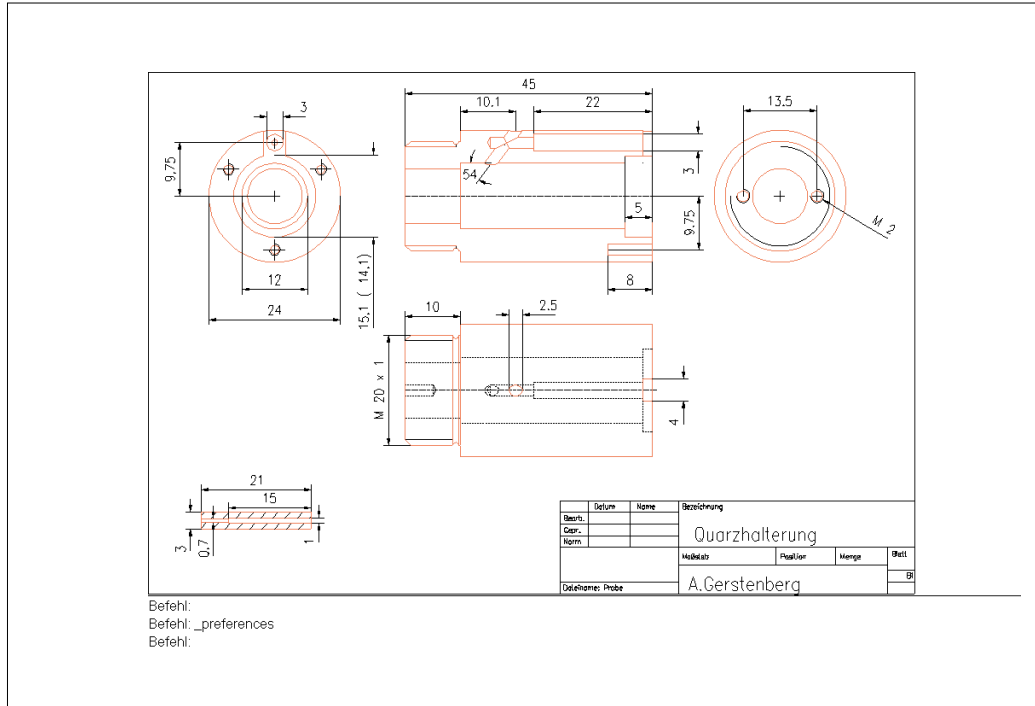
Engineering drawing of the quartz holder constructed by the machine shop of the MPI-P (©A. Gerstenberg).
